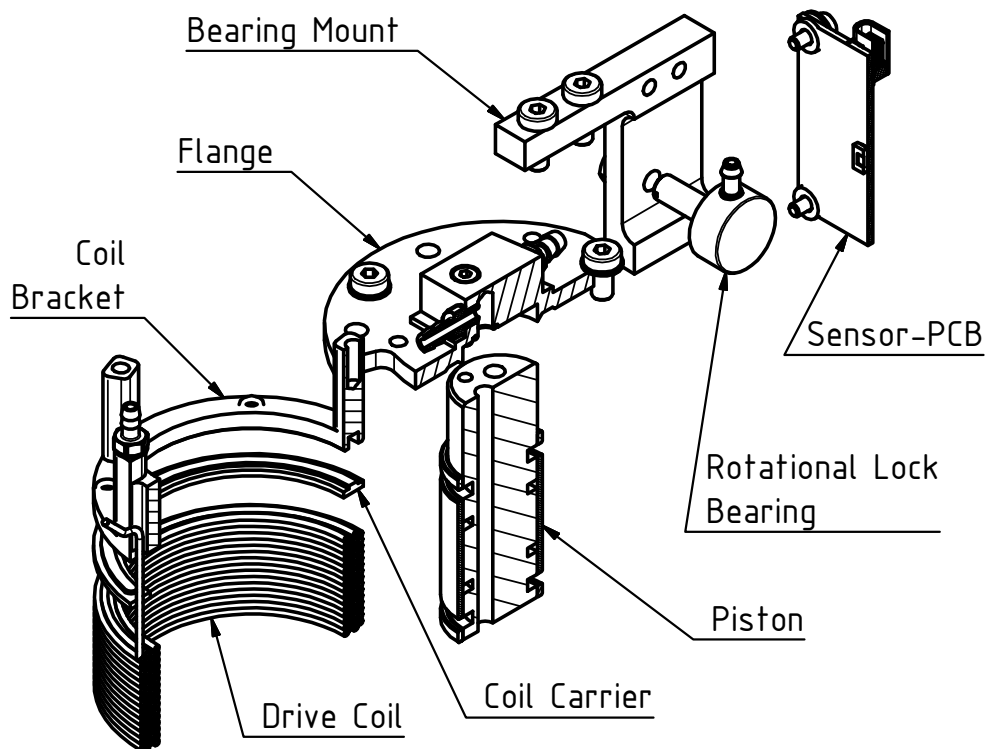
Explosional, cross-sectional view of the components of the active top assembly
